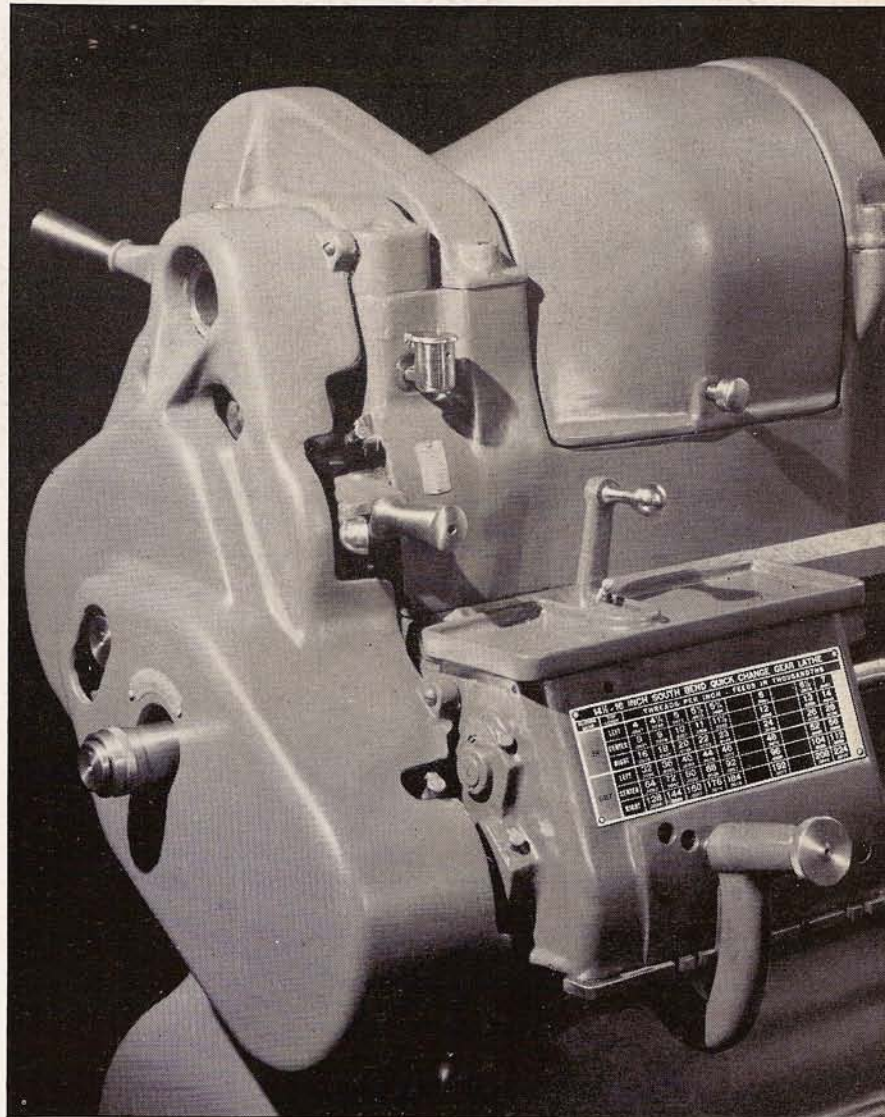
Quick Change Gear Mechanism for 10-inch and Larger South Bend Lathes
